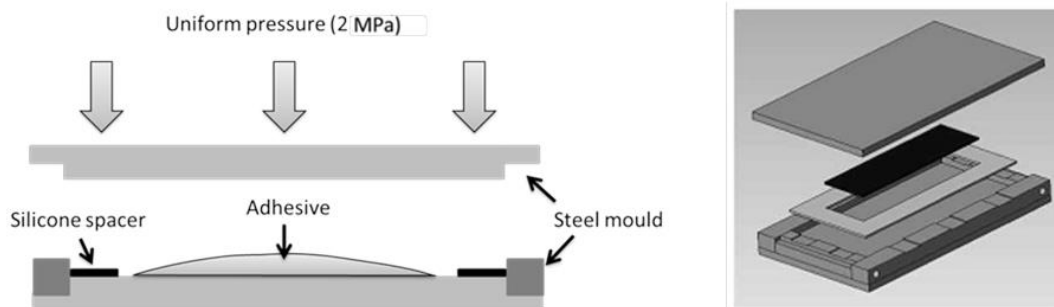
Mould for bulk specimens. Expanded view with steel plates and silicone rubber frame [17].
